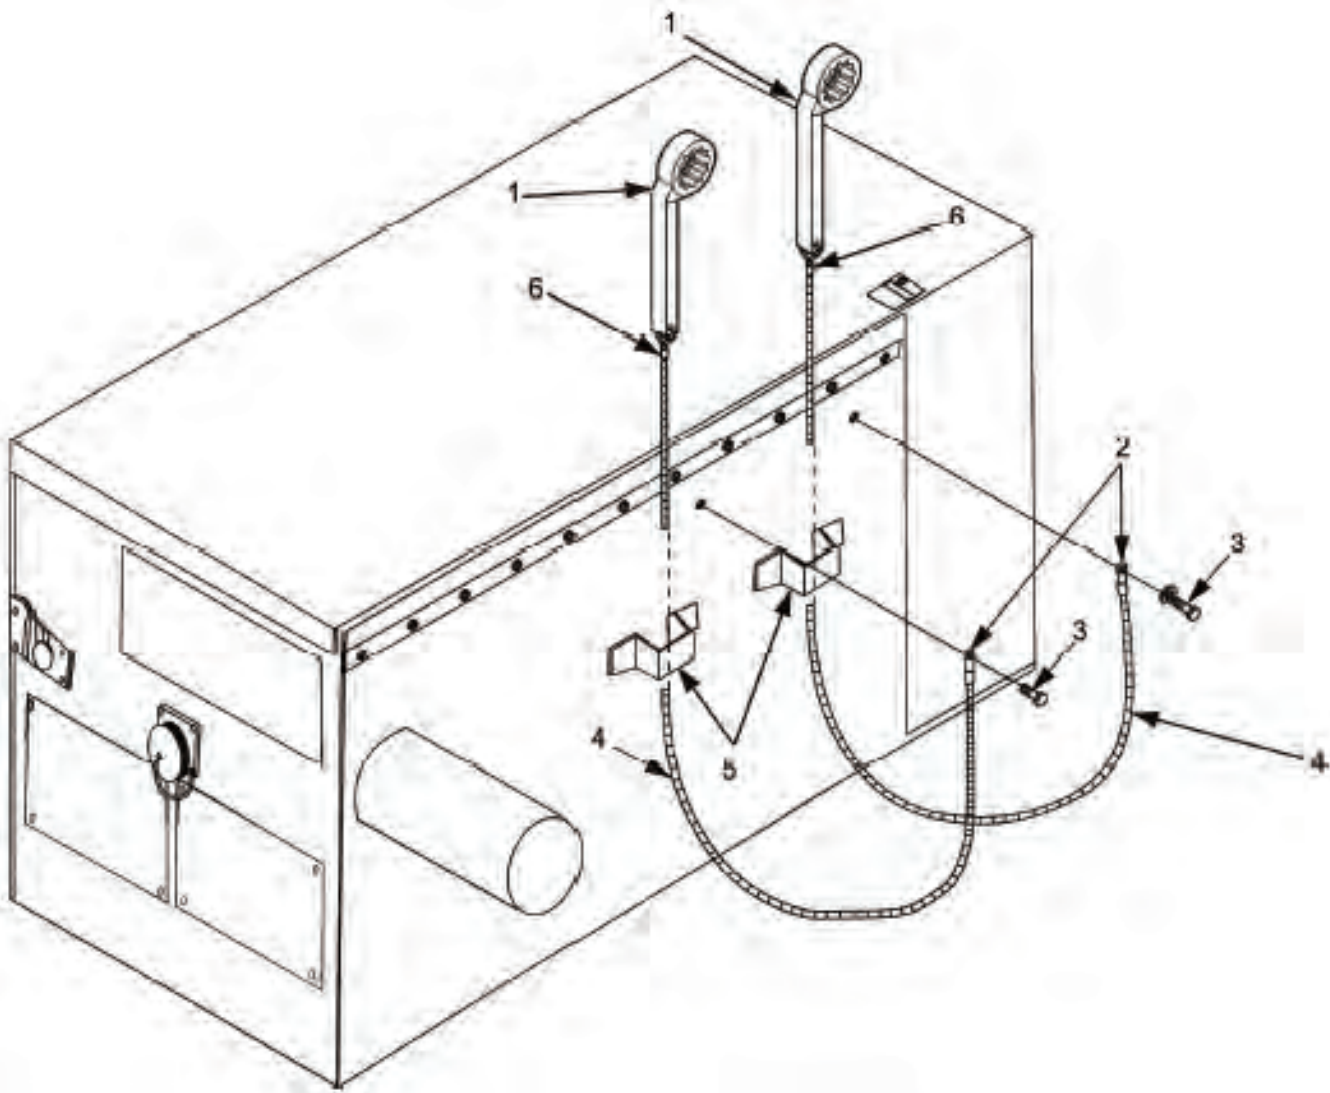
Switch Box Load Terminal Wrench Assembly Replacement (B & C Models).
